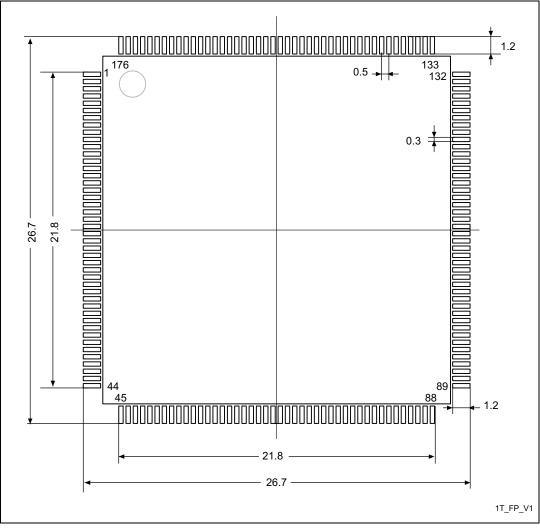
LQFP176 - 176-pin, 24 x 24 mm low profile quad flat package recommended footprint
